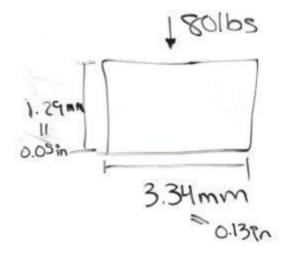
Cross-Sectional Area of the T-Plate with Dimensions
